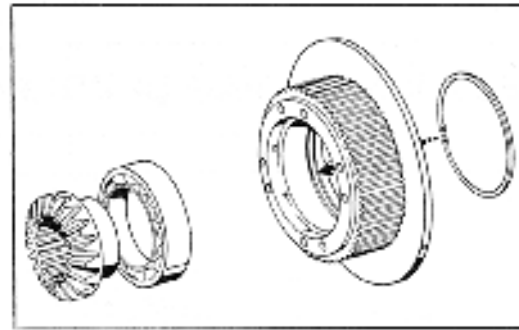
Reverse Clutch Flange, Roller Bearing and Bevel Gear.
